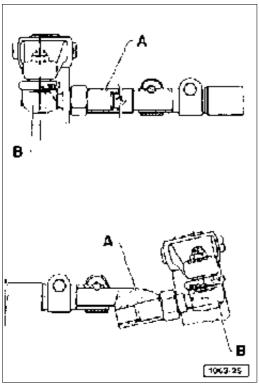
Steering linkage. A - Sleeve B - Steering knuckle
